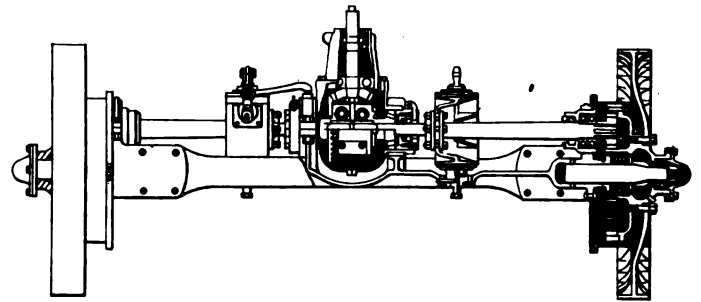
AN INTERNAL-GEAR AXLE HAVING SUPERPOSED AUXILIARY OR PINION SHAFTS
